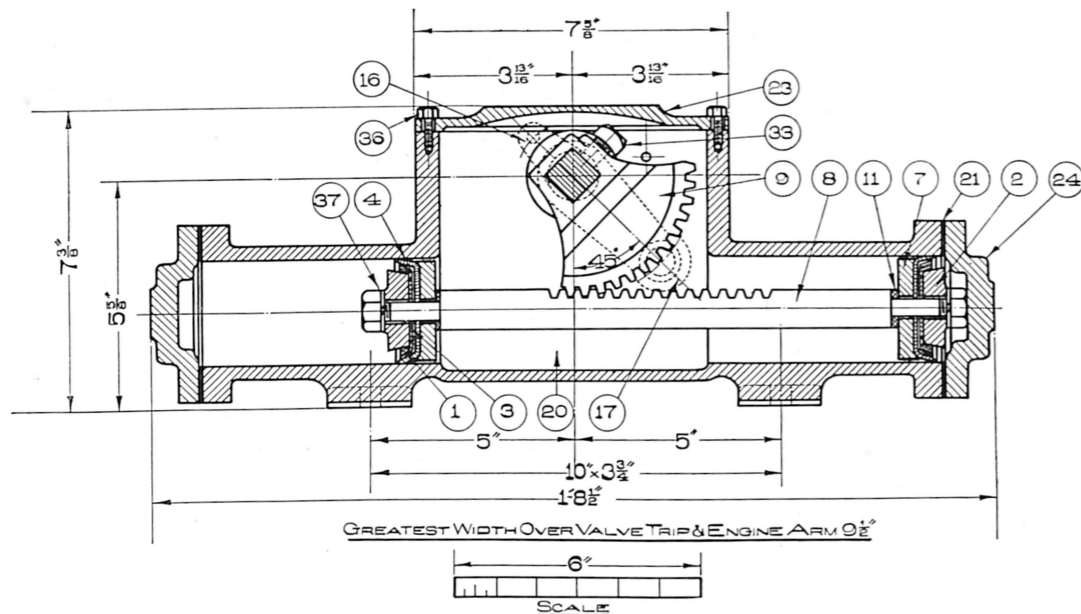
Sectional View of Type "E" Folding Door Engine, showing principal parts.
